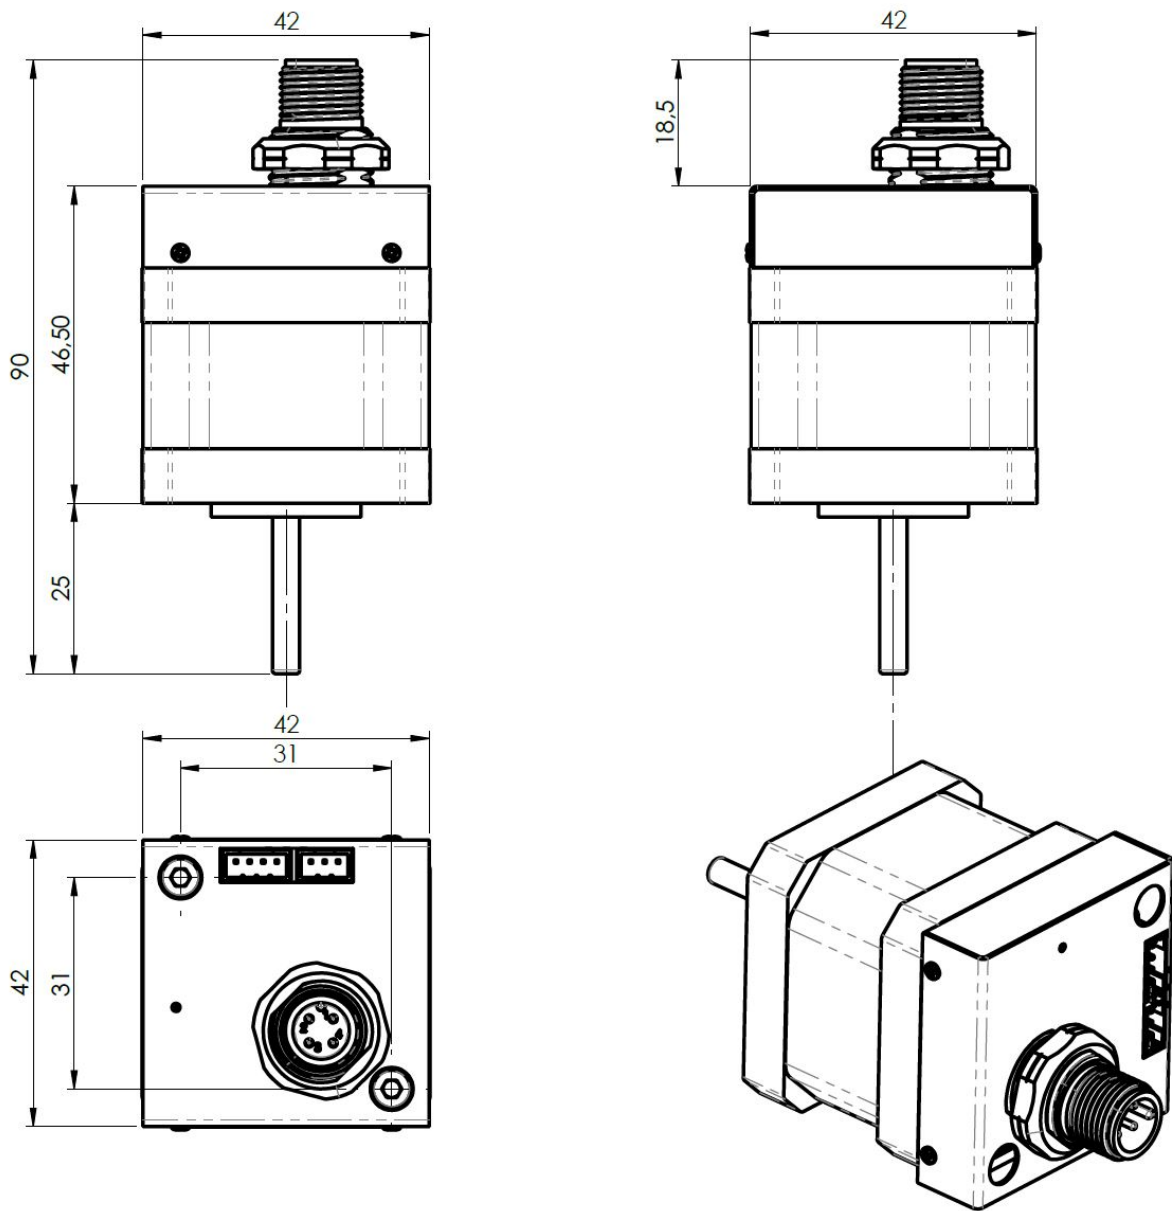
PD42-1-1243 with NEMA17 / 42mm stepper motor (all dimensions in mm)
